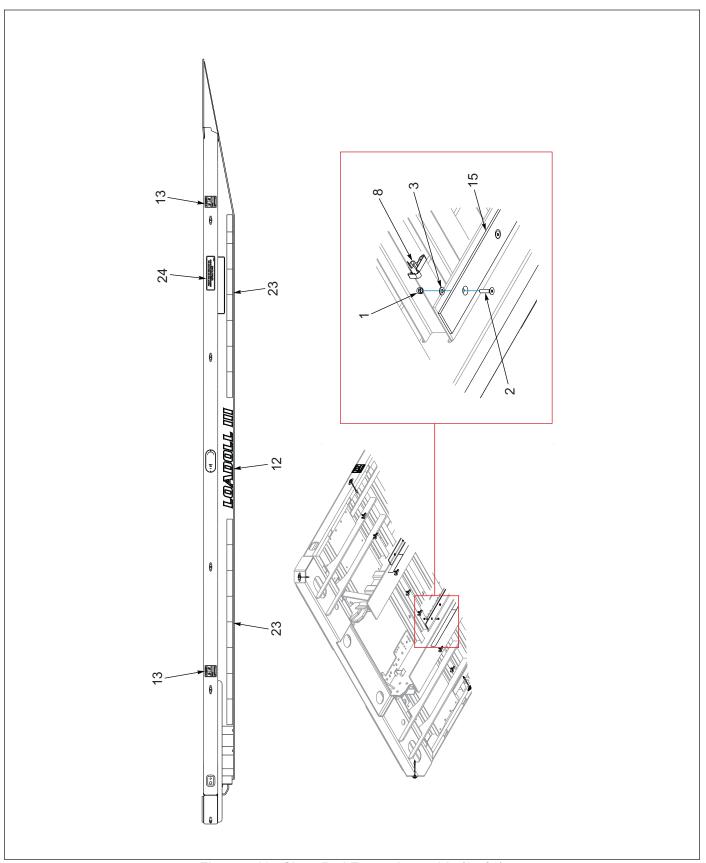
Short Bed Frame Assembly (1 of 2)
